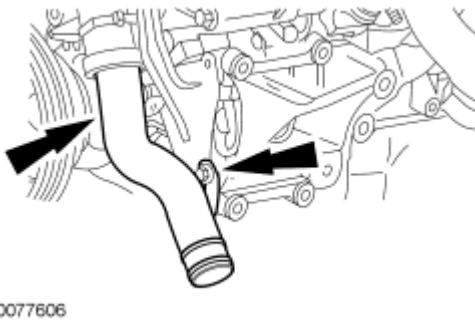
Locating Coolant Pump Extension Tube & Bracket Bolt
